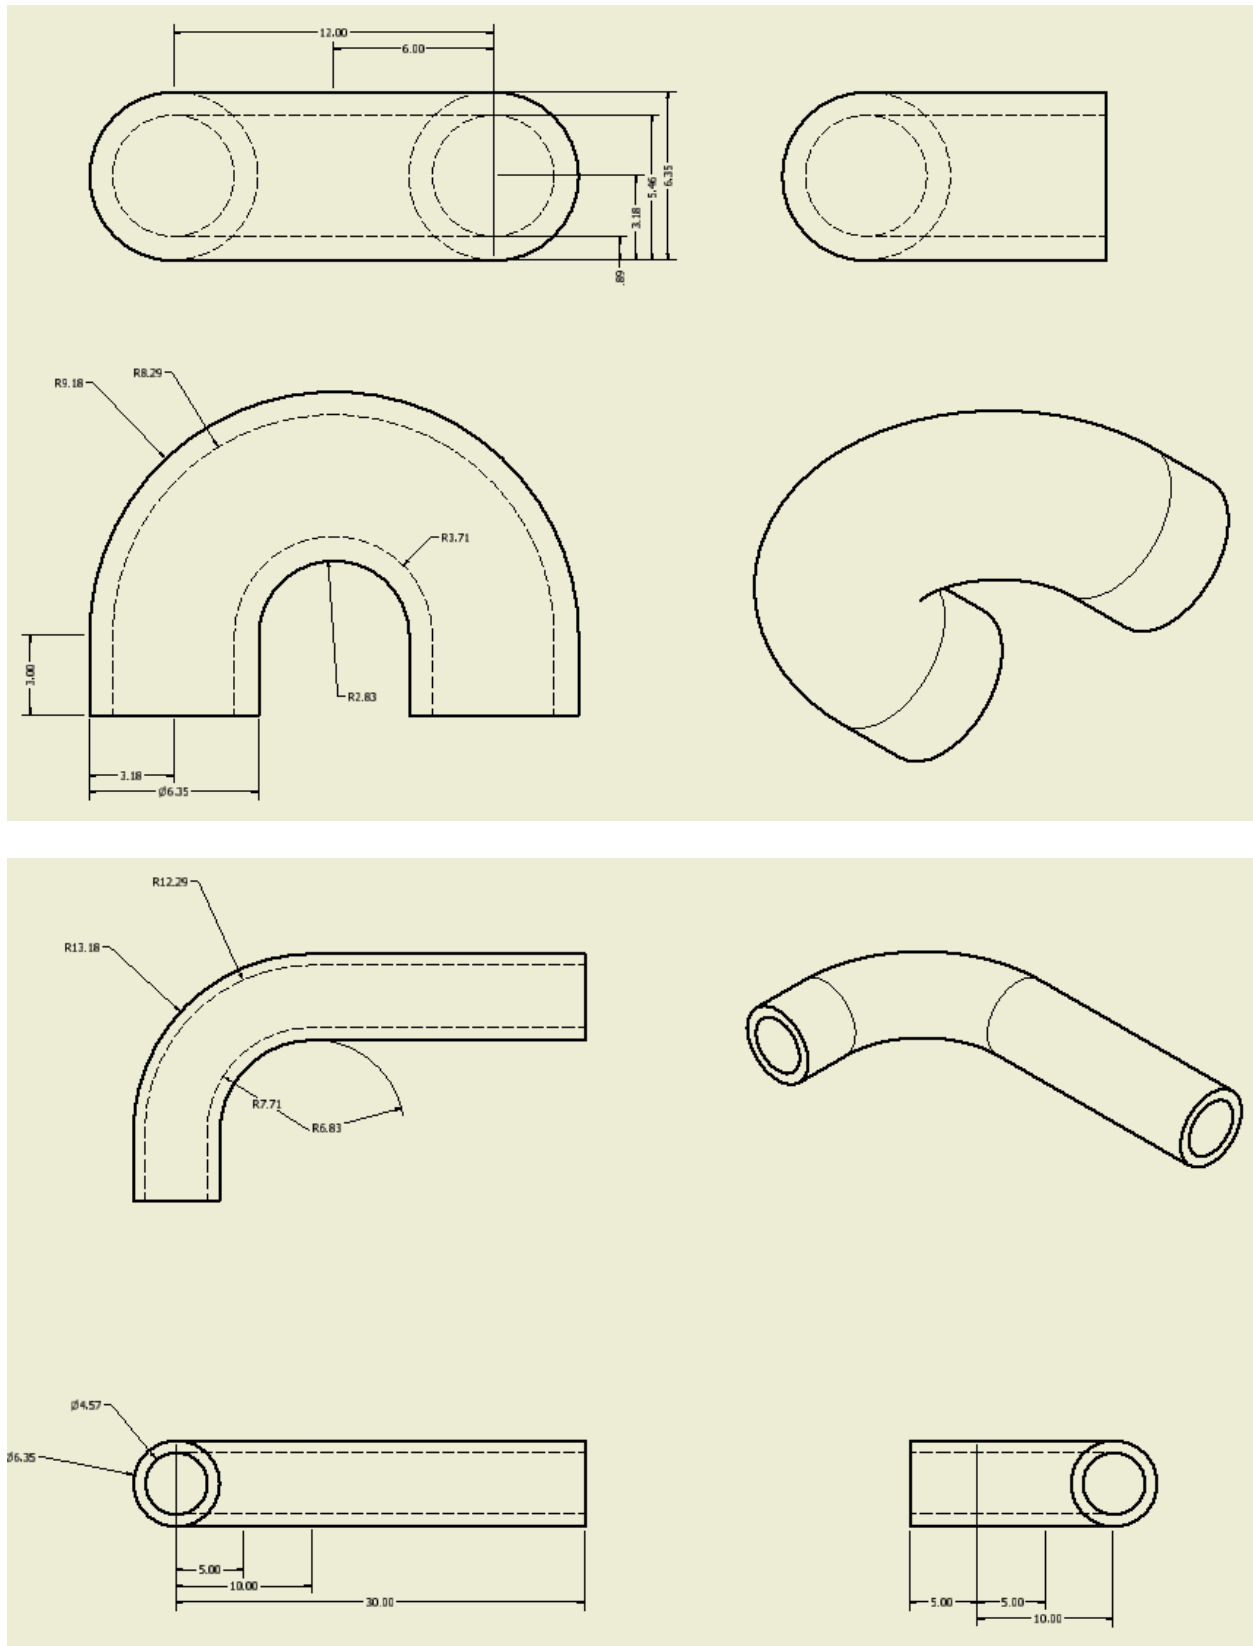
CAD drawing of the cooling channel elbows for the second version LiMIT trenches
